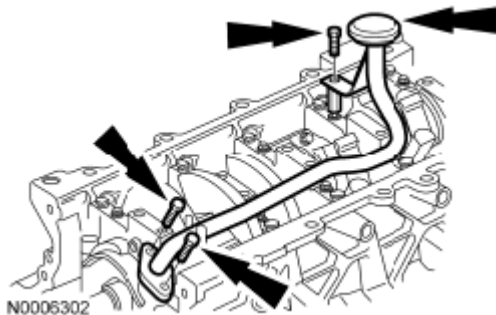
Locating Oil Pump Screen And Pickup Tube With Bolts
